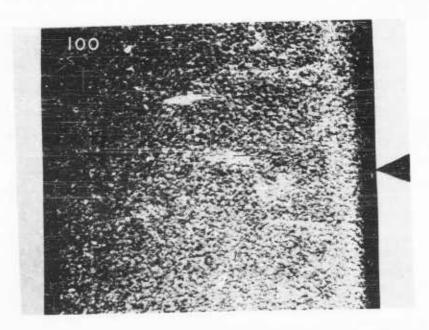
FAILURE IN SPECIMEN NO. 100
